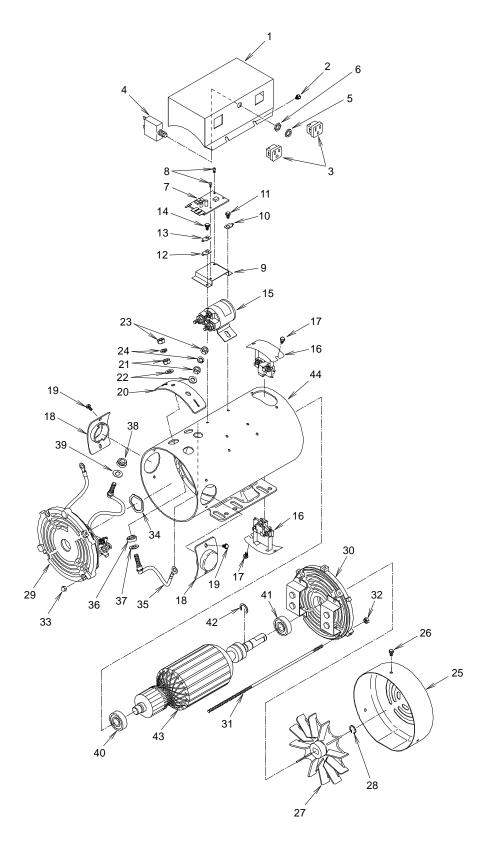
24-Volt Large Frame Generator, Earlier Version, continued
